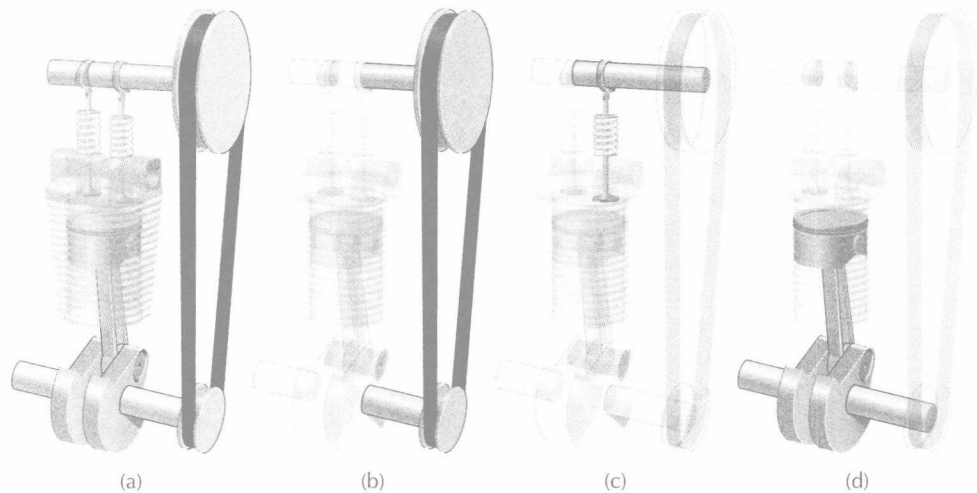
Mechanisms in a single-cylinder piston engine: (a) Engine. (b) Timing belt drive. (c) Cam mechanism. (d) Slider crank mechanism.
